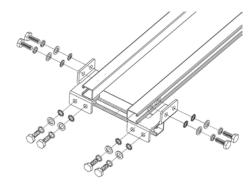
Corner bracket to rail assembly (Refer to Support Rail Assembly)
